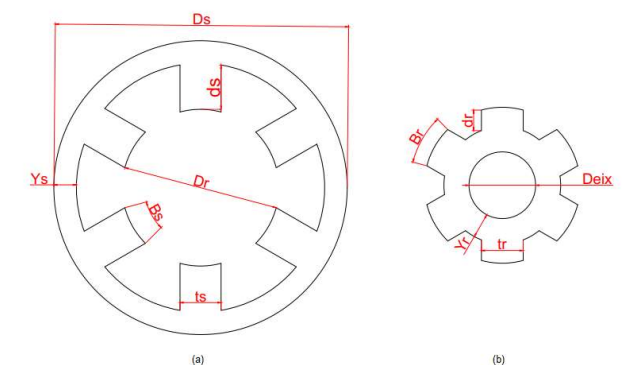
Dimensions: (a) stator e (b) rotor, of the single-phase variable reluctance 6x6 motor
